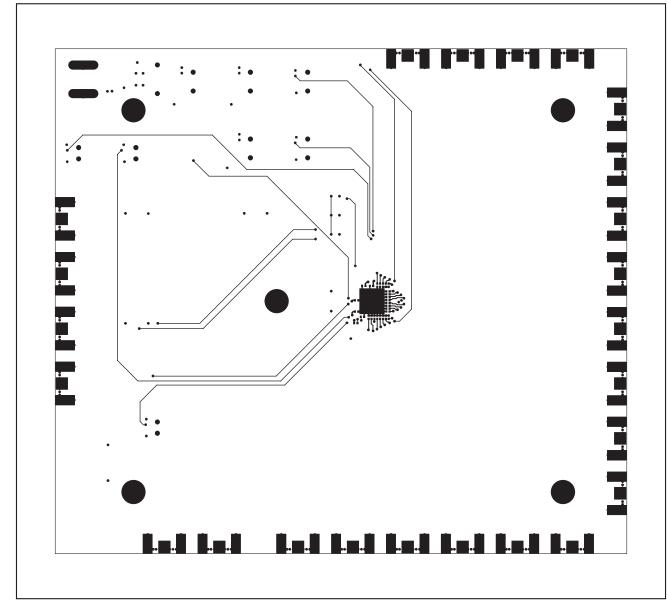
MAX3673 EV Kit PCB Layout—Solder Side
